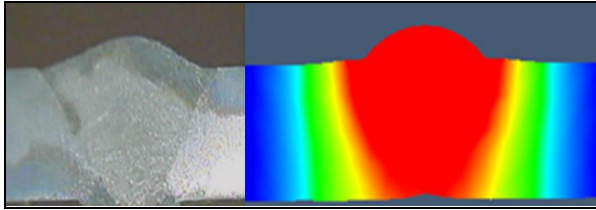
Macrographs of specimen (left) and predicted weld fusion zone (right)
